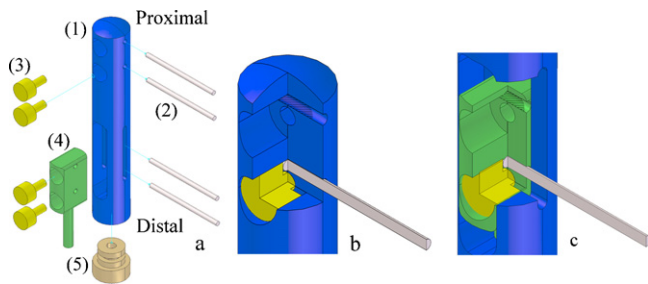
(a) Exploded view of fixator: fixator body (1), fixator screws (2), bolts (3), sliding part (4) and axial positioning screw (5). The sliding part enables to adjust the distance between proximal and distal screws. During function '4' and '5' are locked, preventing any axial movement. (b) Section view of proximal and (c) distal part of fixator. In the empty drill hole, crosshatching shows the contact area that experiences the compressive preload due to bolt tightening.
